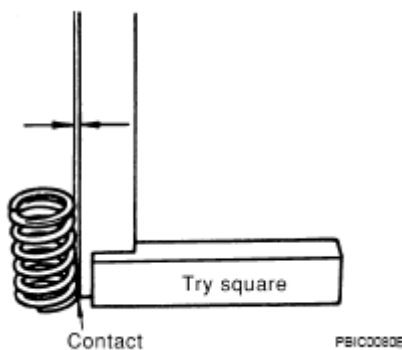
Measuring Clearance Between Top Of Valve Spring And Try Square
